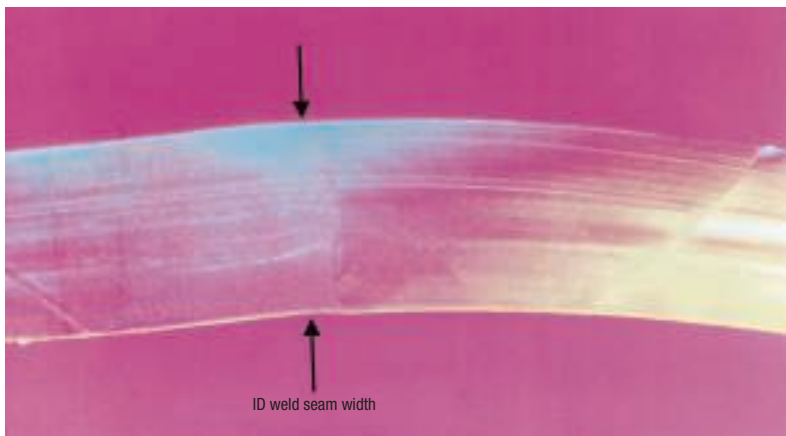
A closeup of a BCF fusion weld seam is shown here [3]
